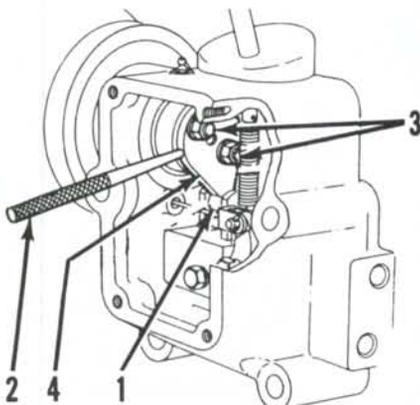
View showing adjustment of rockshaft cam. Refer to paragraph 312.
